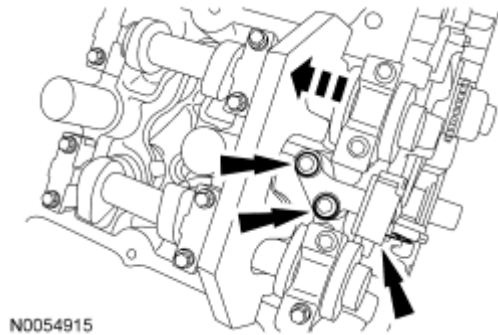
Locating RH Secondary Timing Chain Tensioner Bolts
